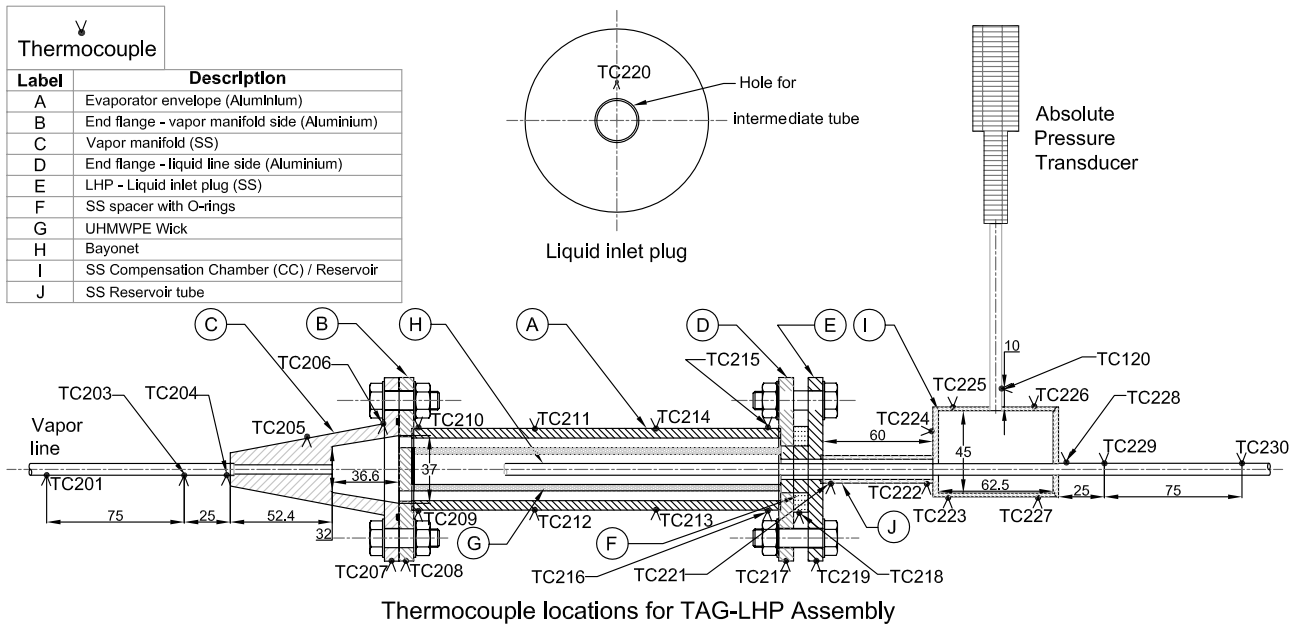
TAG evaporator assembly for a TAG-LHP.
